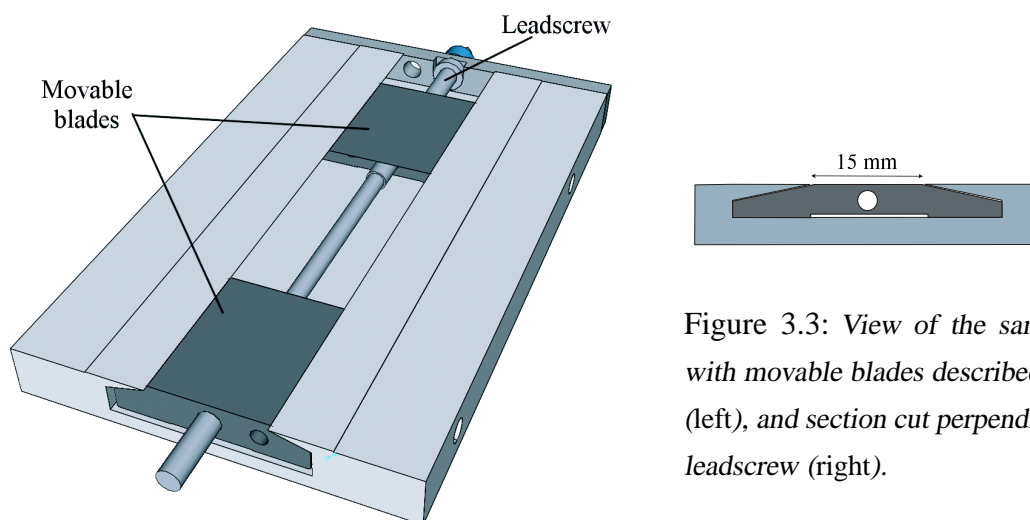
View of the sample holder with movable blades described in the text (left), and section cut perpendicular to the leadscrew (right).
